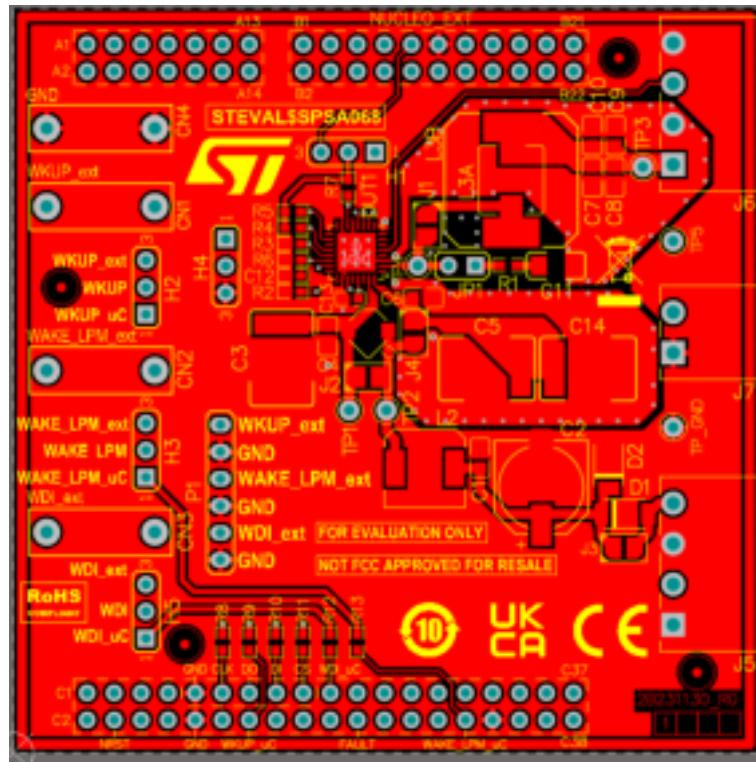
STEVAL-SPSA068 application board assembly BOTTOM
